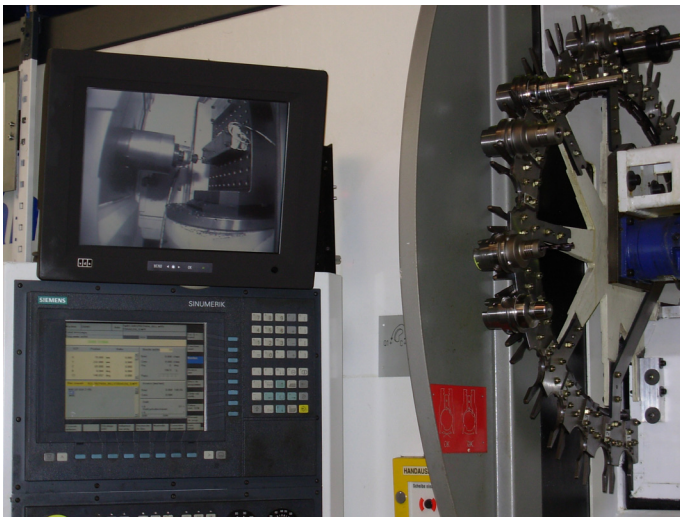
Tool magazine, video camera and numerical control of Urane 20 machine
